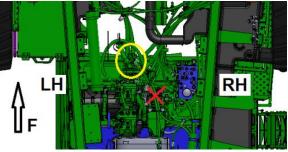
Bottom View of Pump Area Circle – Auxiliary Hydraulic Pump
